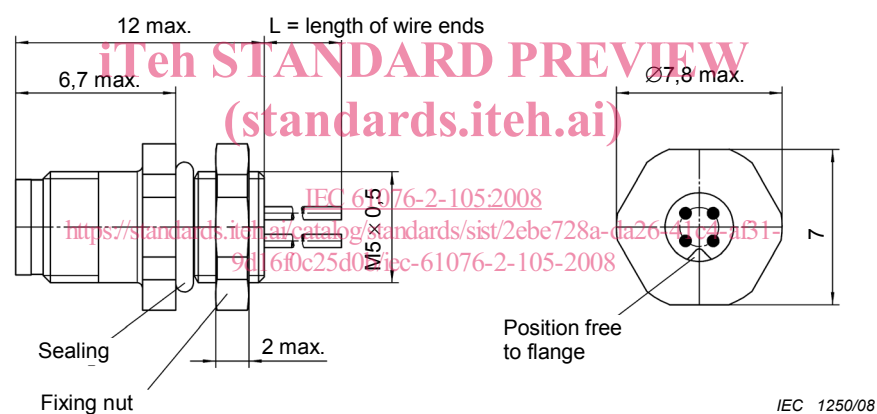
Fixed connector, male contacts, mounting with thread M5 x 0,5, with wire ends, single hole mounting M5 x 0,5, mounting orientation
